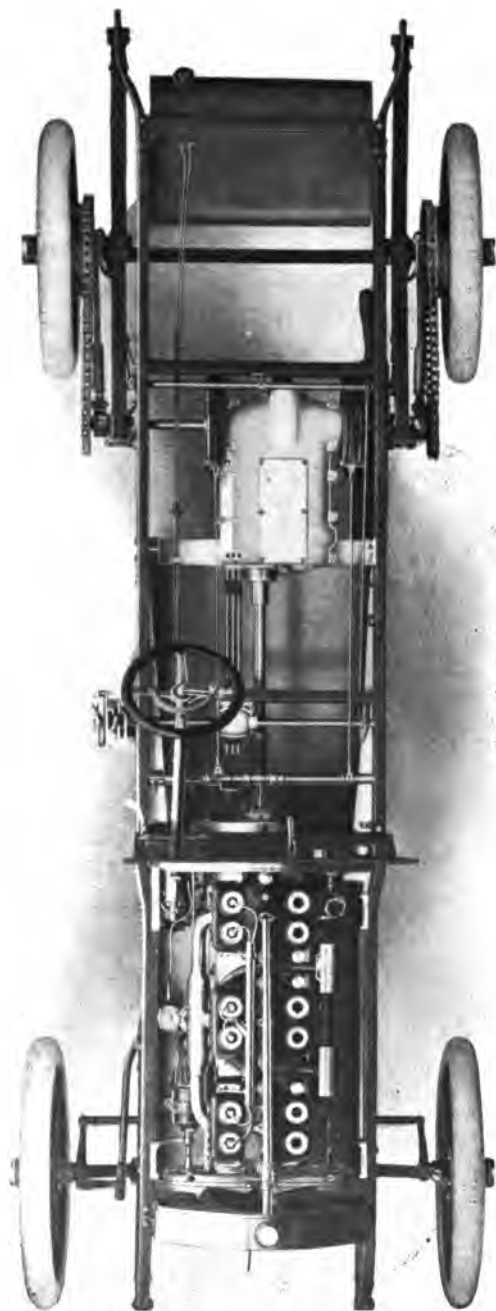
Chassis of a Six Cylinder American Locomotive Car. Double-Chain Drive.
